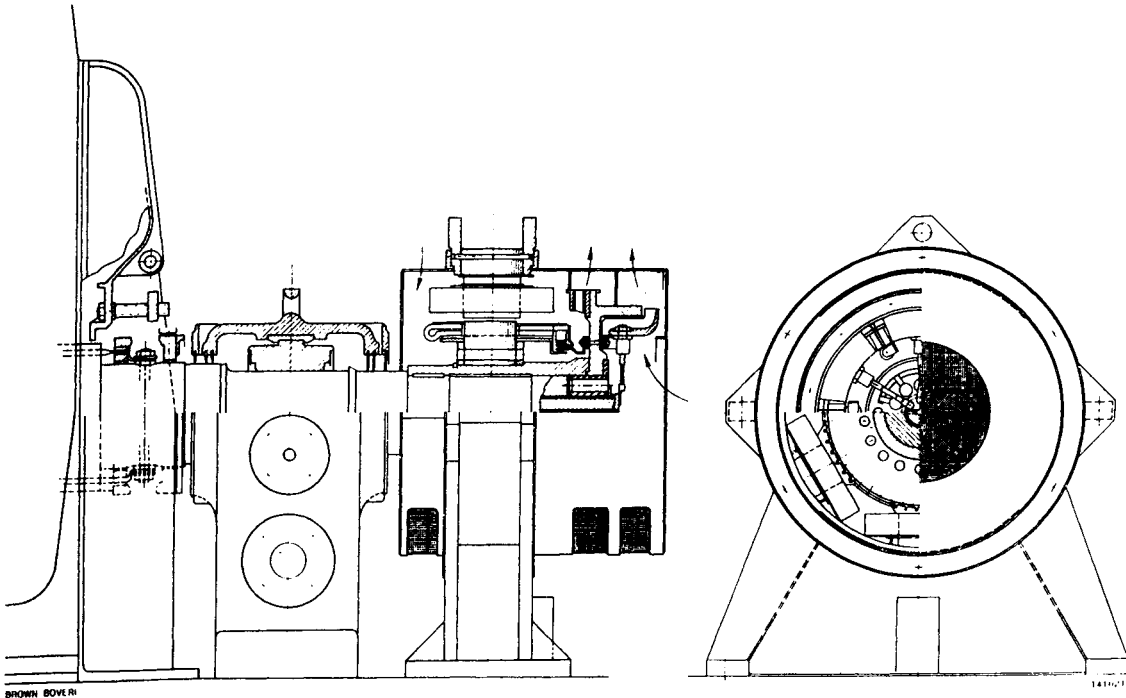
A typical outboard exciter-rectifier arrangement
